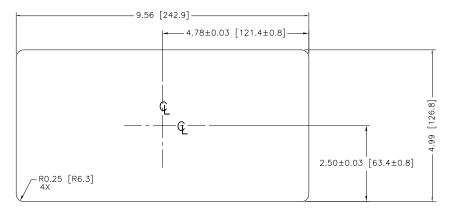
IND560x Panel-Mount Cutout Dimensions
